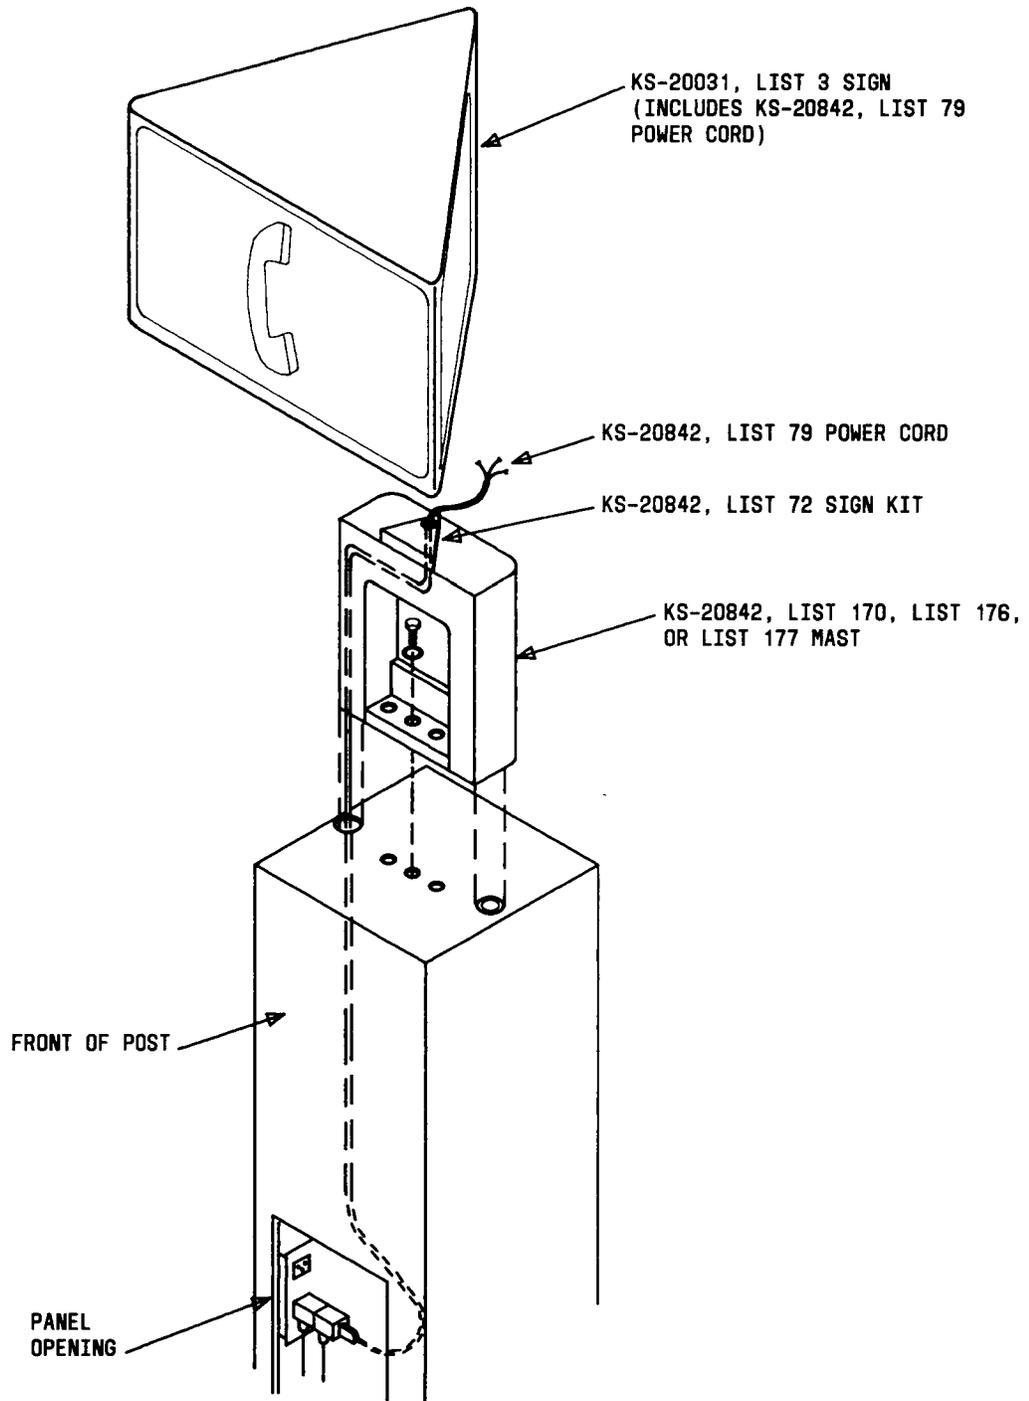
Installation of KS-20031, List 3 Sign on Lists 170, 176, or 177 Mast Assembly
